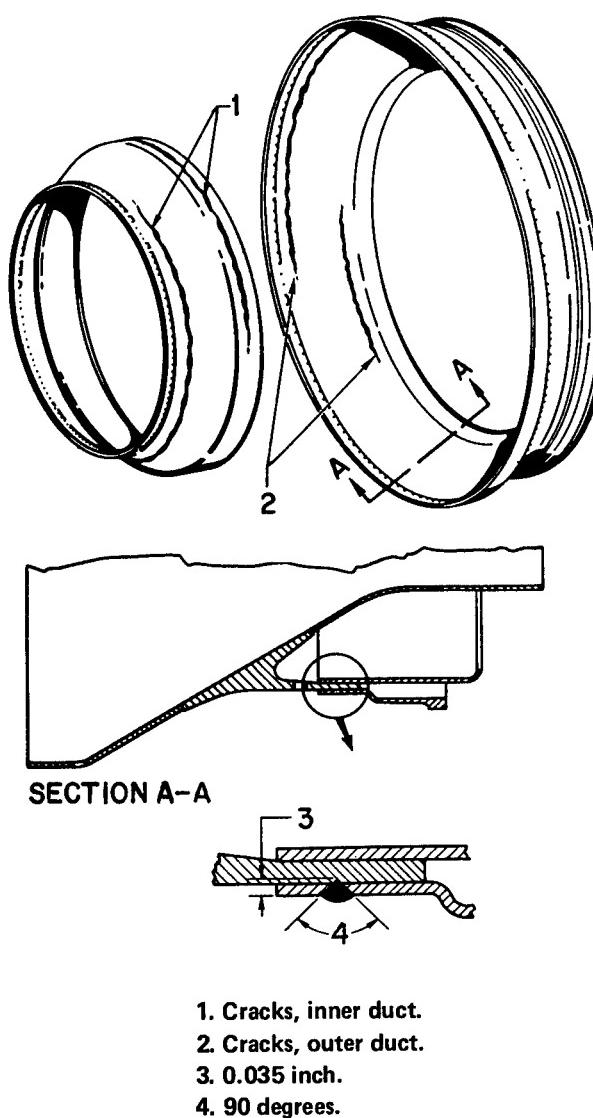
Combustion chamber inner and outer outlet ducts.
